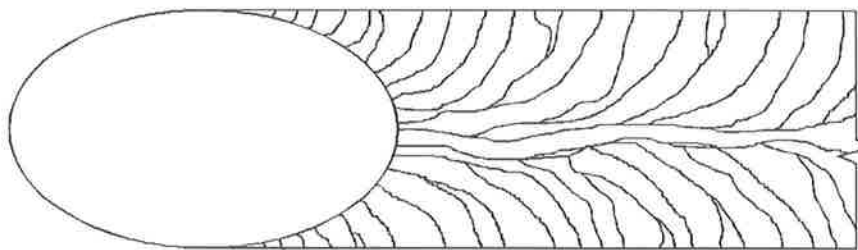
(b): Schematic representation of an elliptical shaped weld pool.
